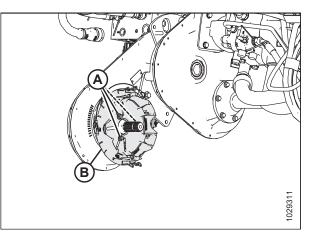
Completion Gearbox Chain Tensioner Cover
